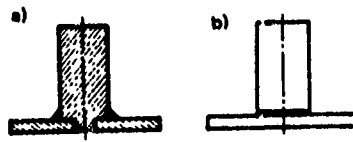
Production of T-shape parts of high-voltage equipment; a - old method; b - friction welding.
